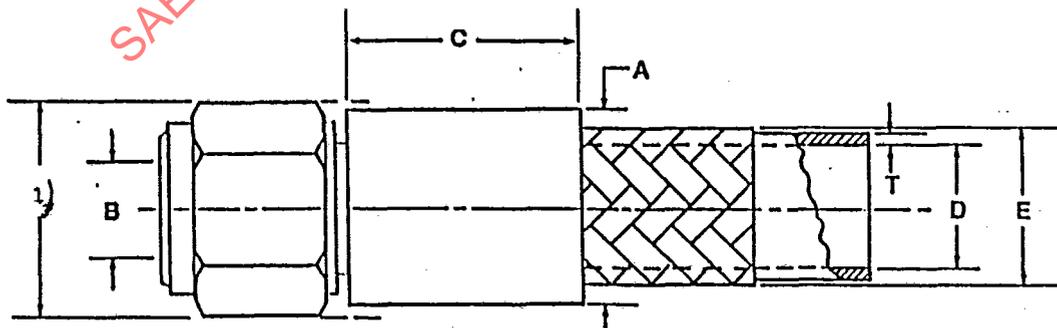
Hose and Fitting Dimensions (Table 1)
